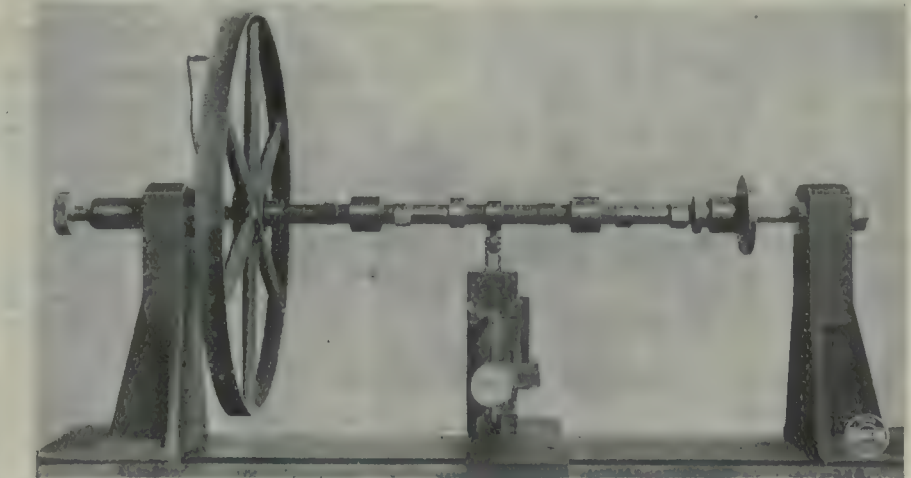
MASTER CAM BLANKS, METHOD OF MARKING.
